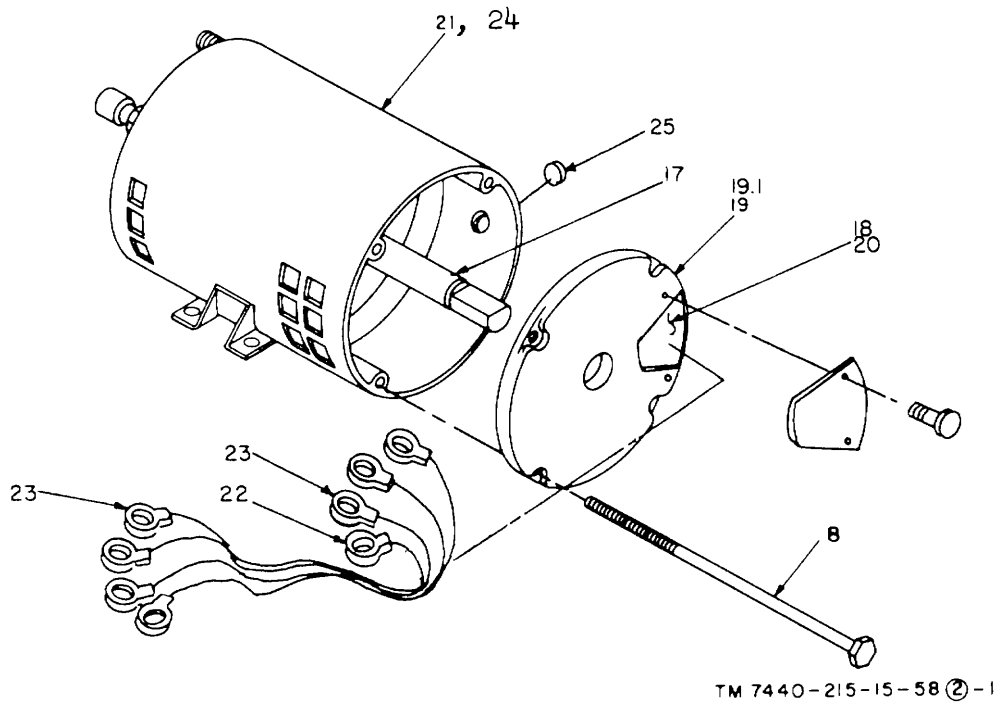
(2). Motor and pump, exploded view (part 2 of 2).
